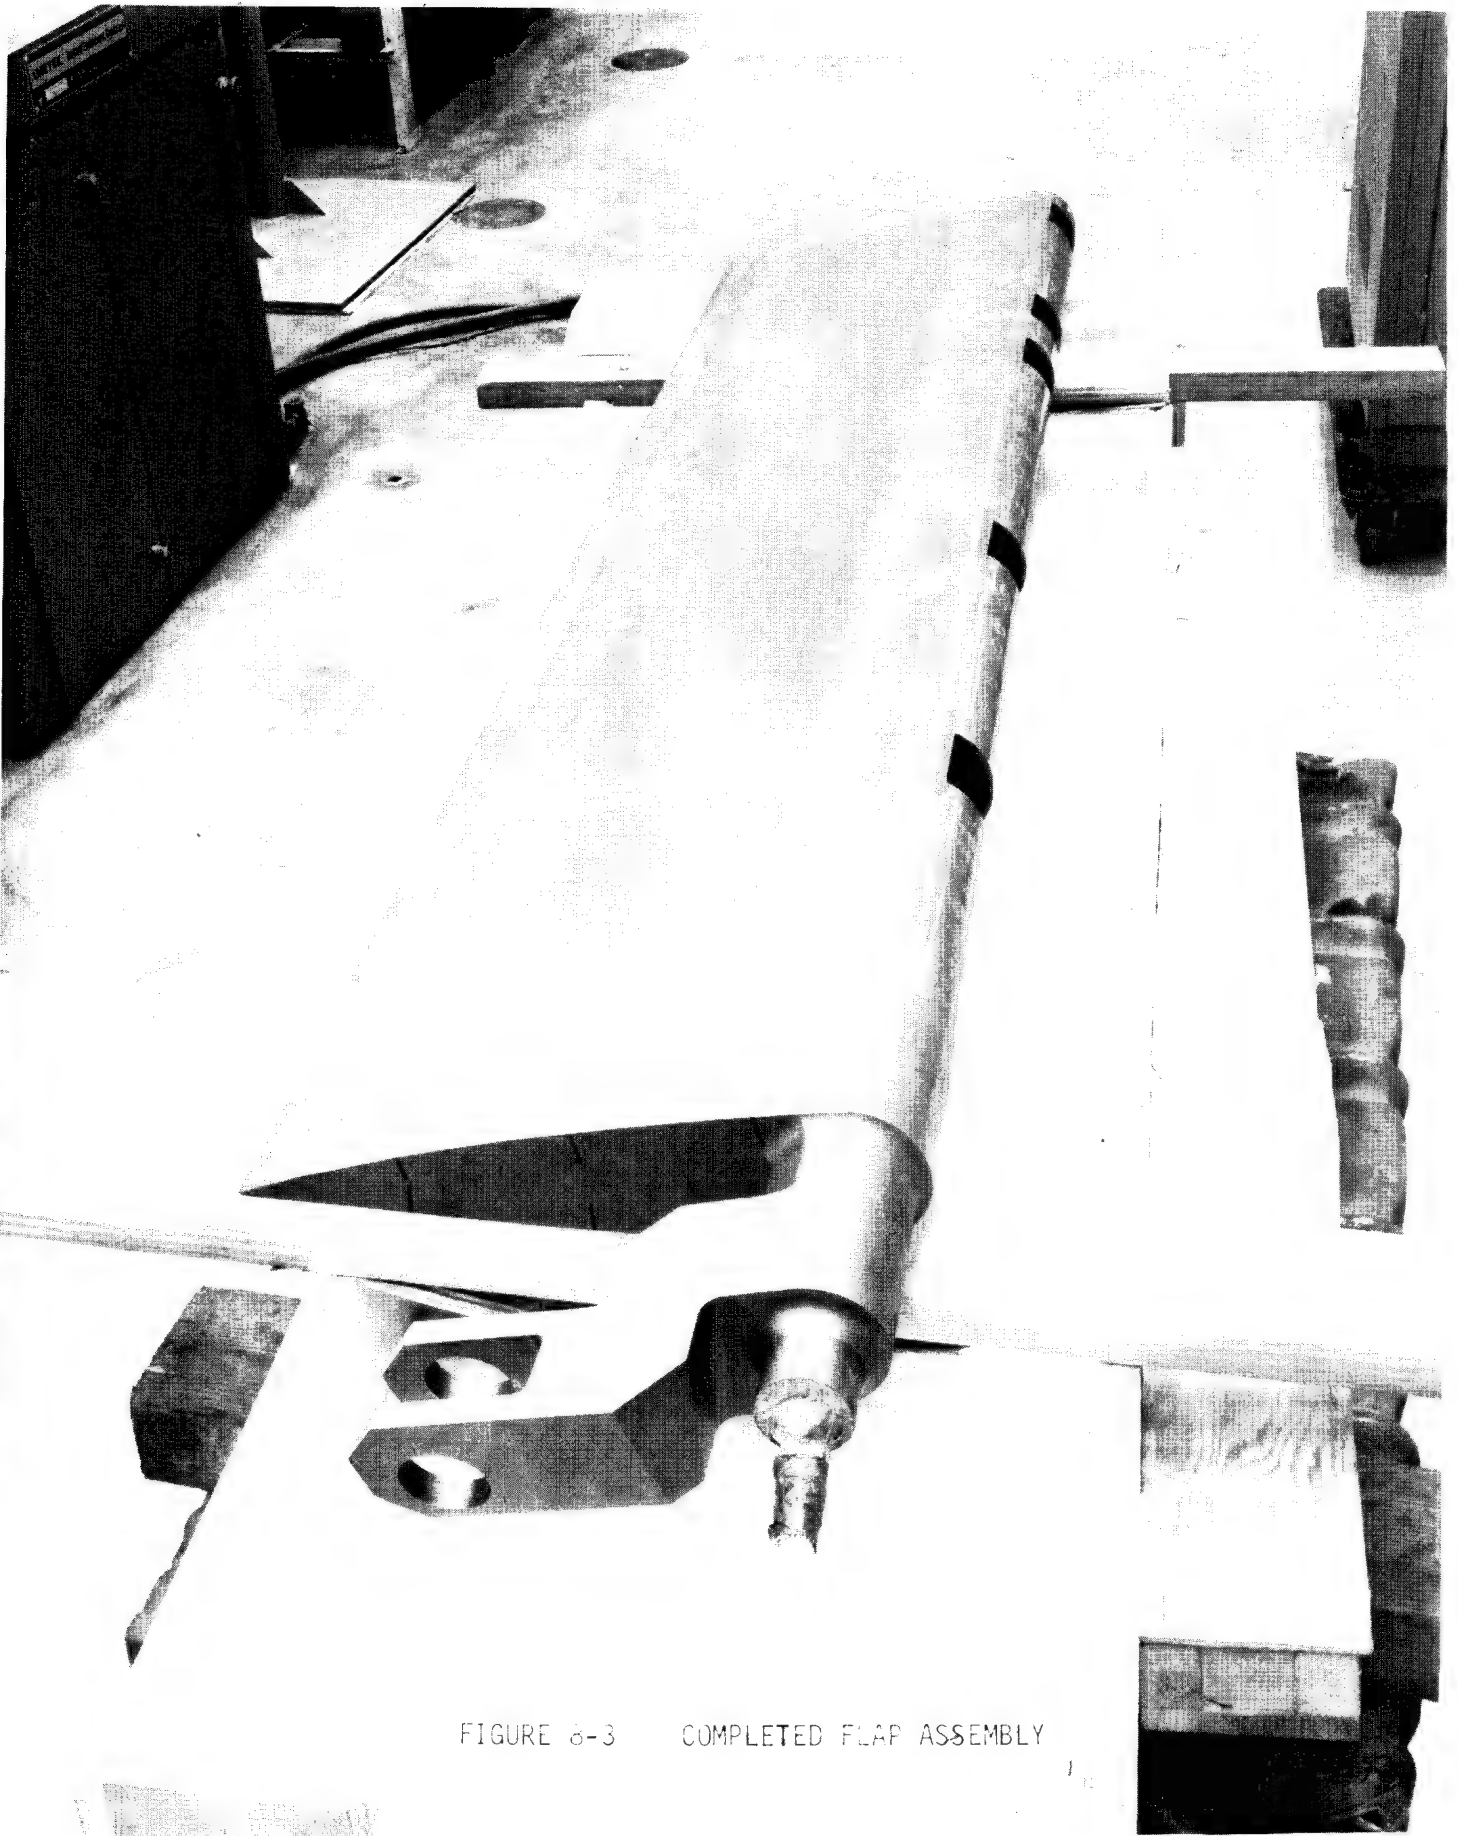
COMPLETED FLAP ASSEMBLY
